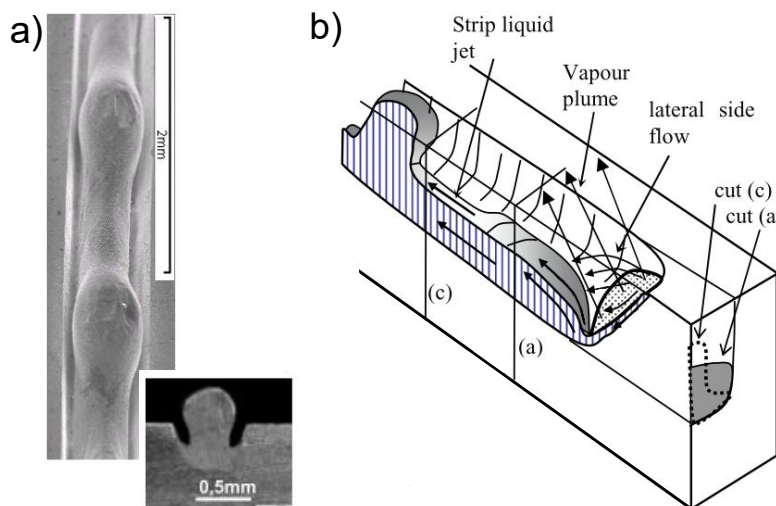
Humping phenomenon; a) example of humping defect of a laser weld with insert showing melt pool cross section and b) schematic of melt pool morphology and dynamics to explain humping; reproduced from Fabbro et al. [107], with permission of the Laser Institute of America
